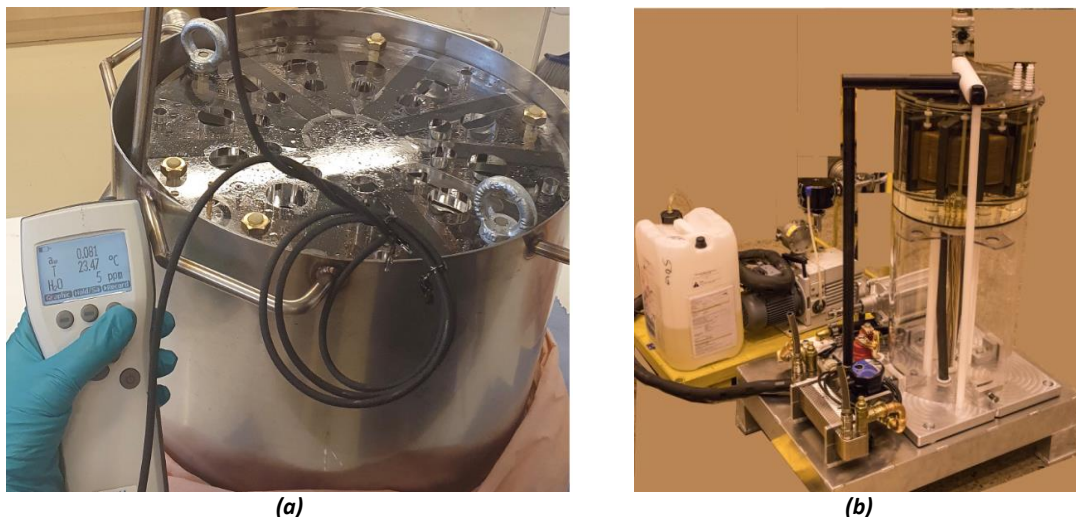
The active part ready to be mantled in the transformer tank: the active part in the oil container after oil impregnation (a), and the transformer oil filling setup (b)
